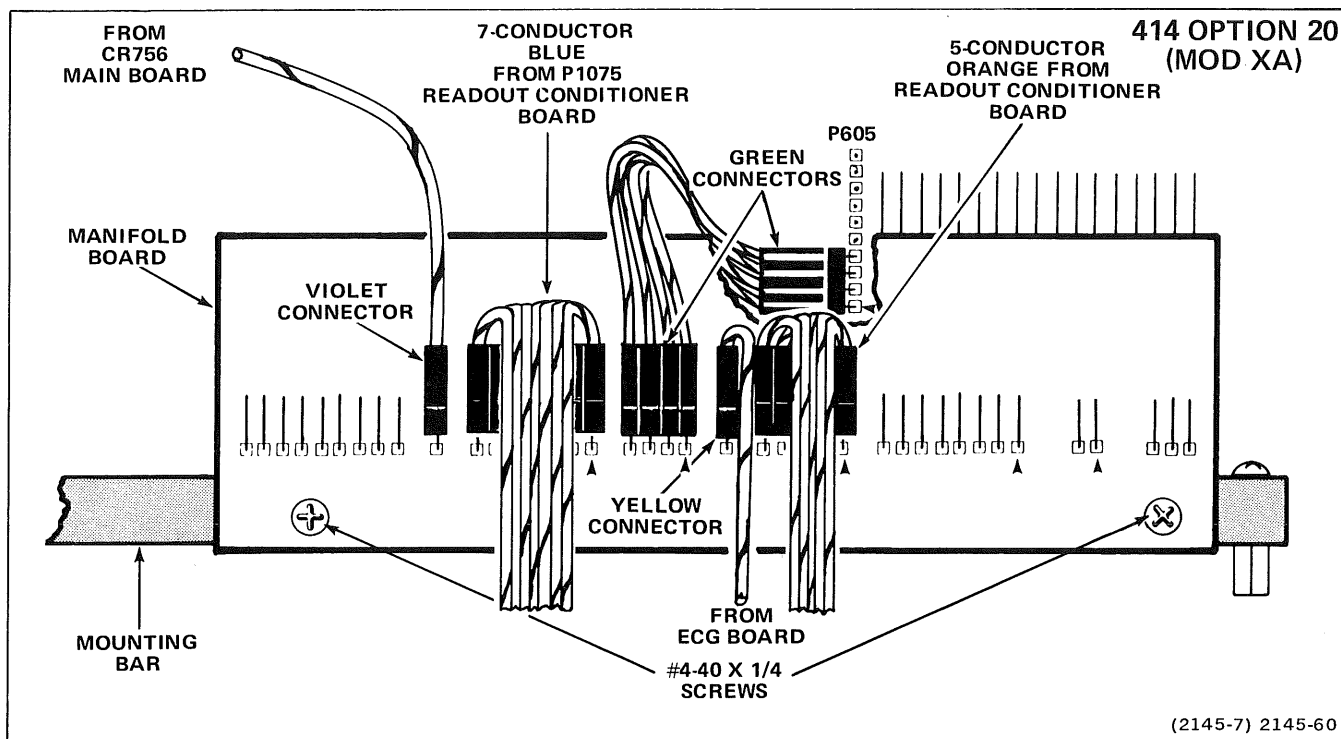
Installing Manifold Board and connecting cables in 414 Option 20 (MOD XA).
